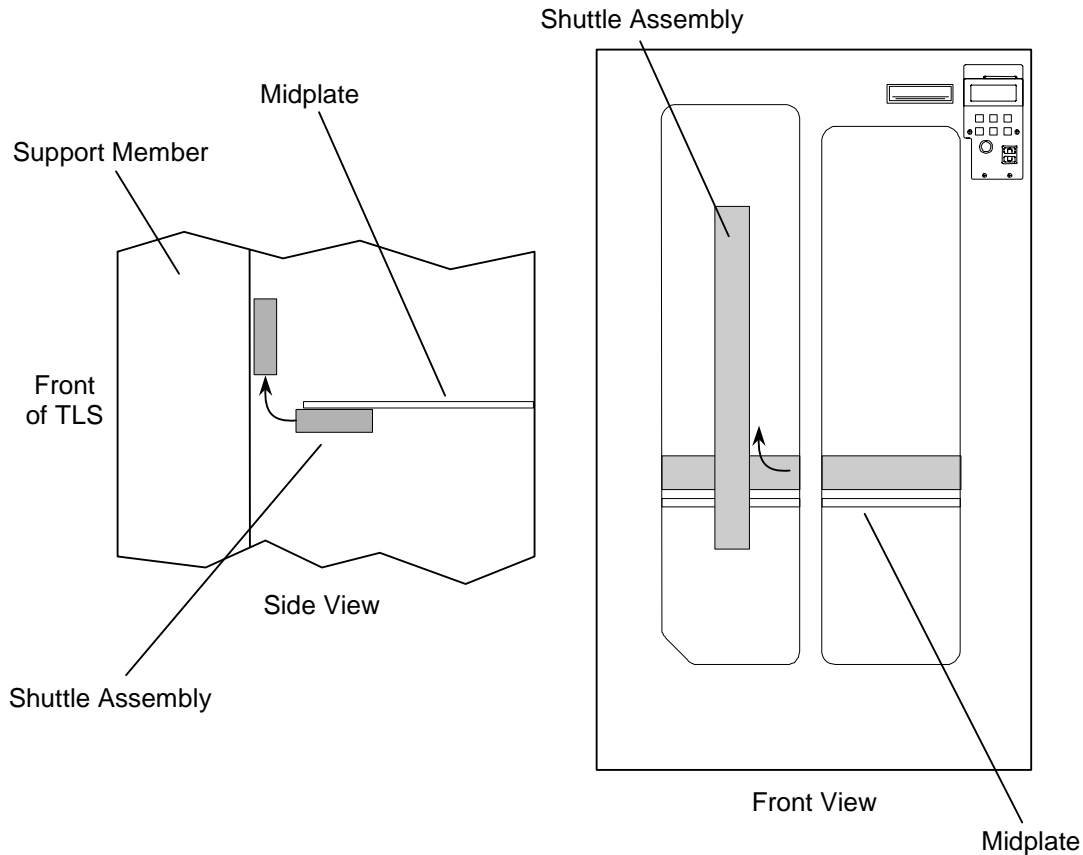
Two Views of Shuttle Assembly Removal from TLS
